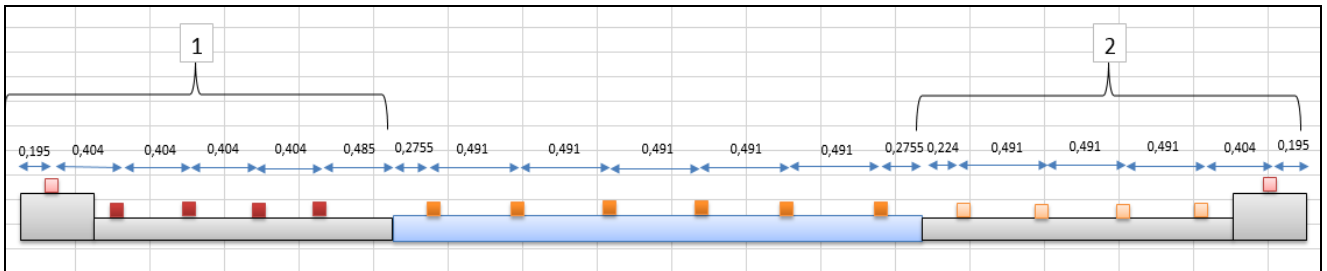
Formers cooling circuit path. SIDE MODULE #1 as-built on the left.
